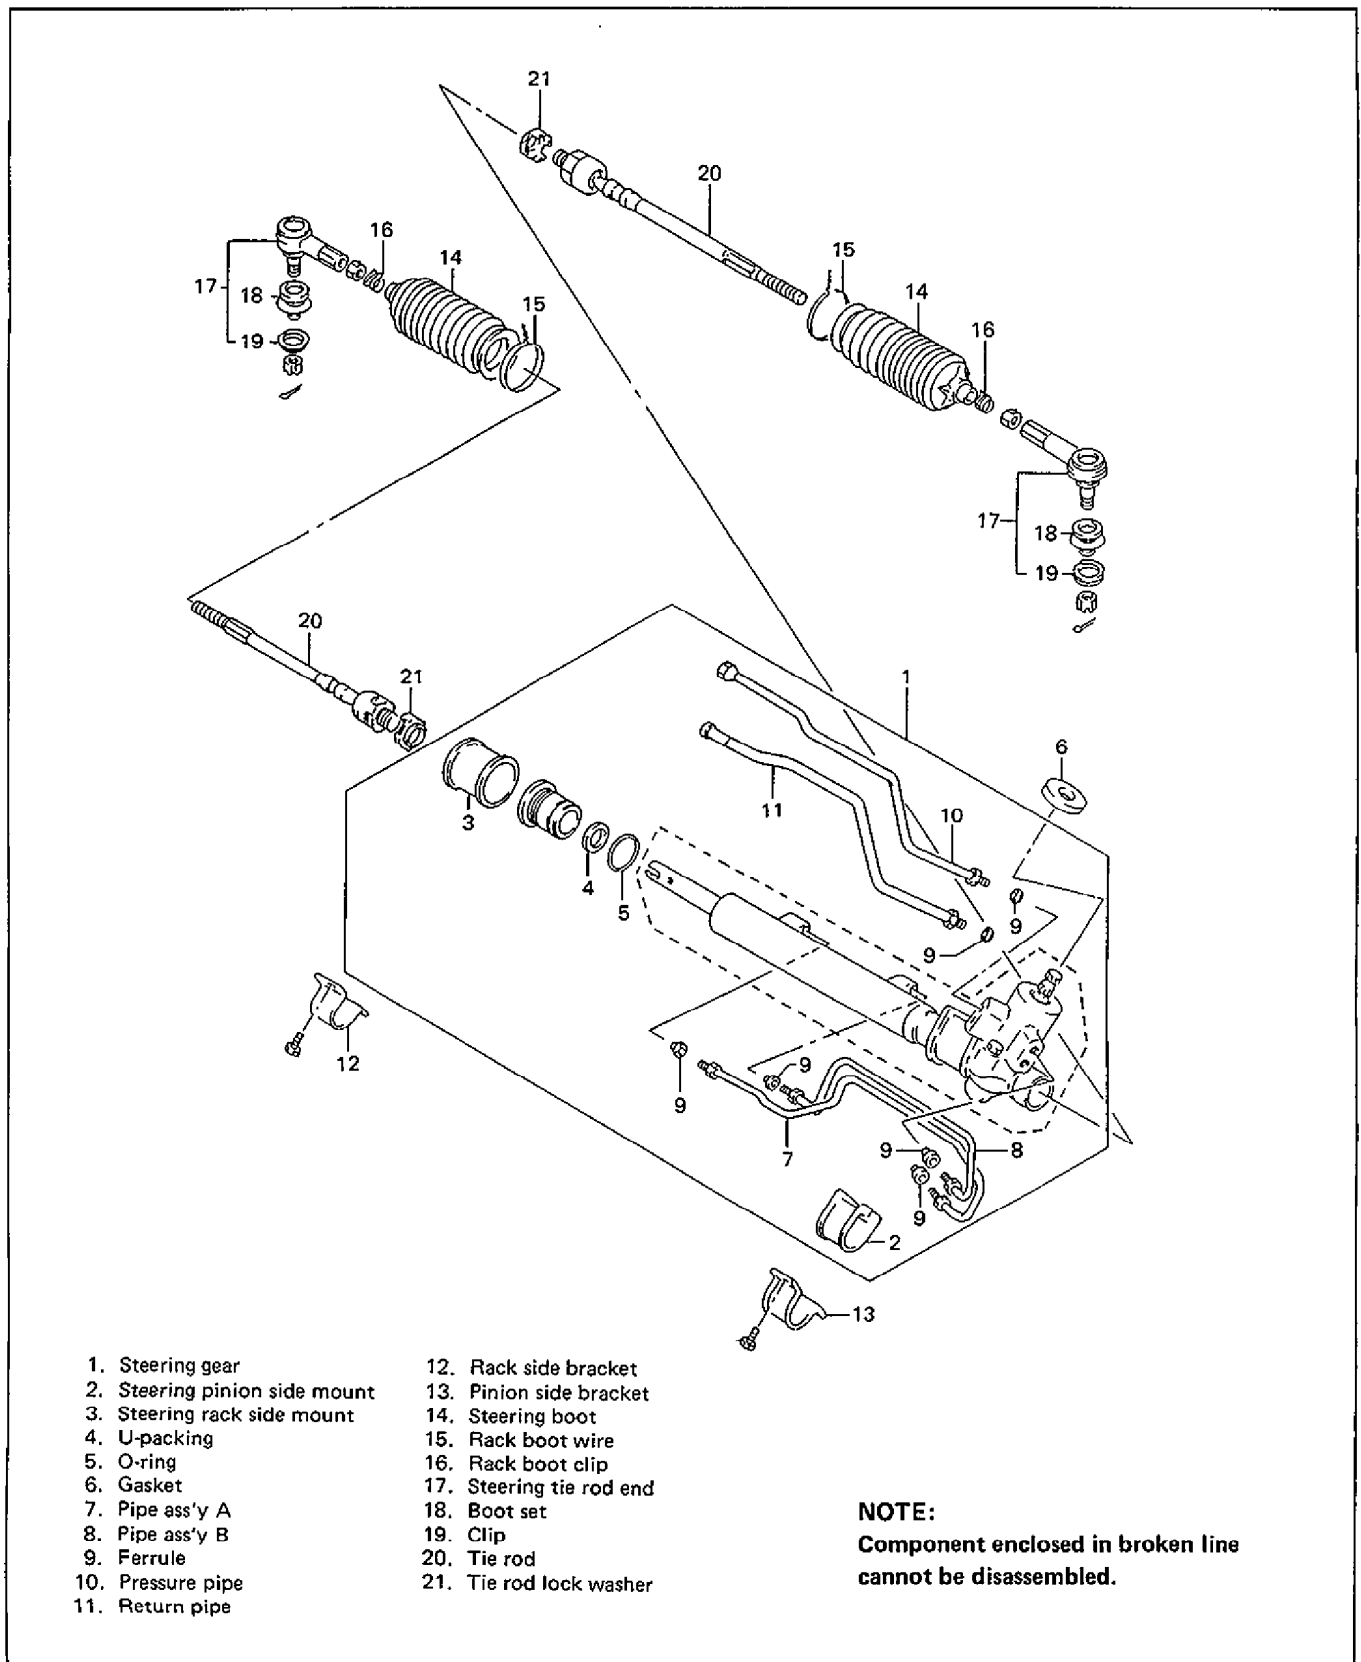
B1-39 Exploded View of Power Steering Gear Box
